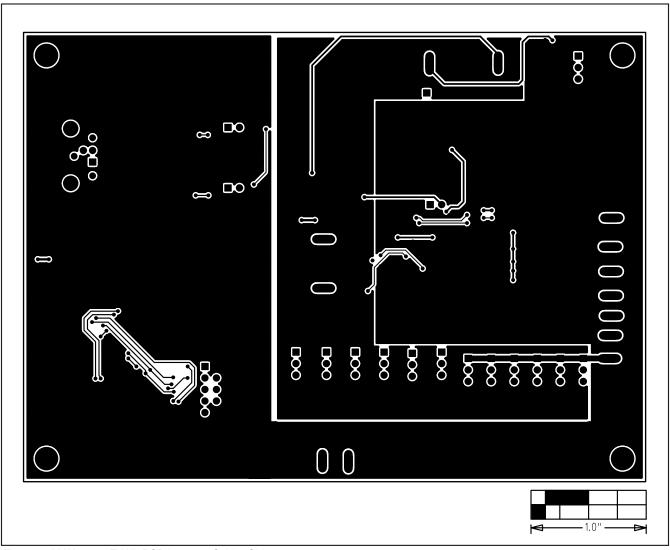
MAX17100 EV Kit PCB Layout—Solder Side
